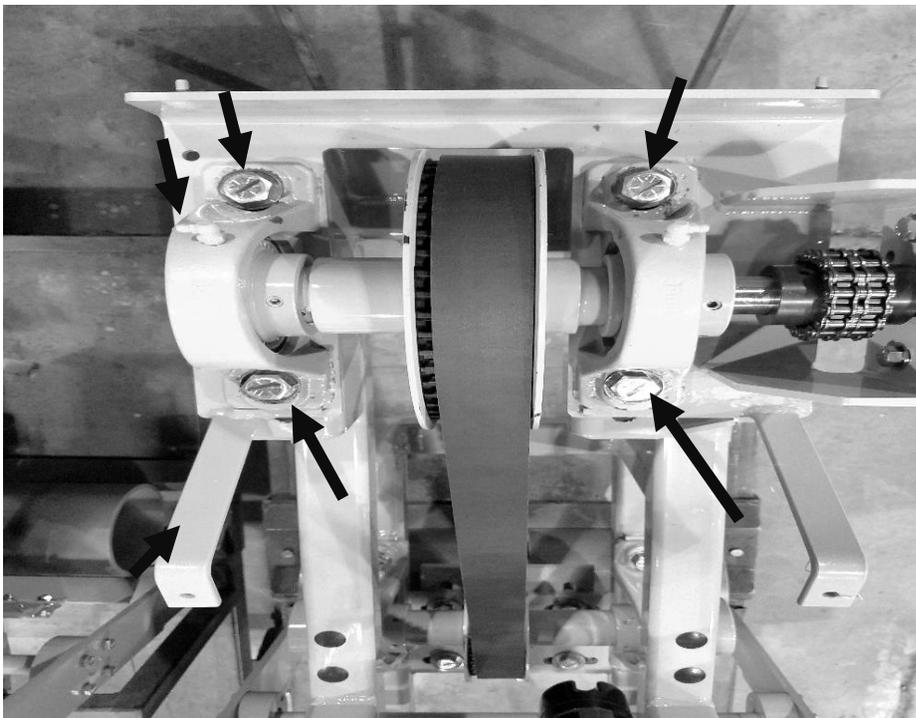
To tension the right cutter head drive belt, loosen the four Fasteners shown.
